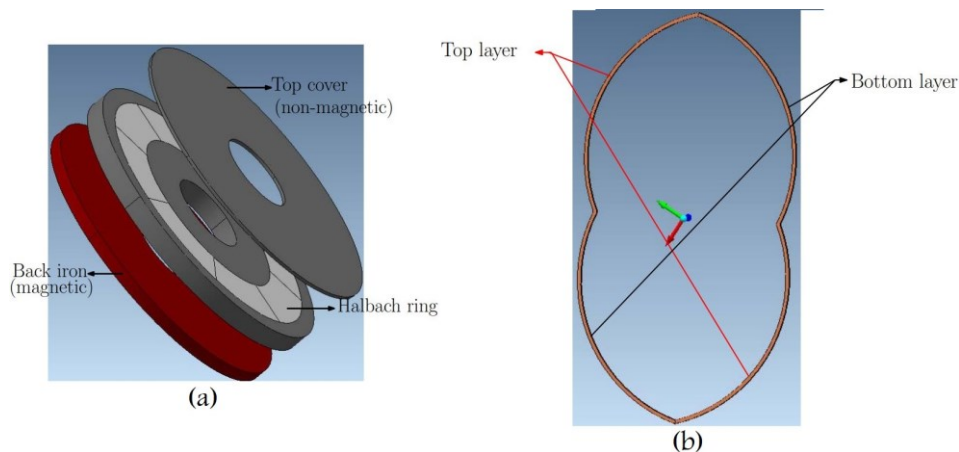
Proposed machine in [66] (a) Exploded view of the Halbach rotor (b) Non-overlapping coils on PCB
